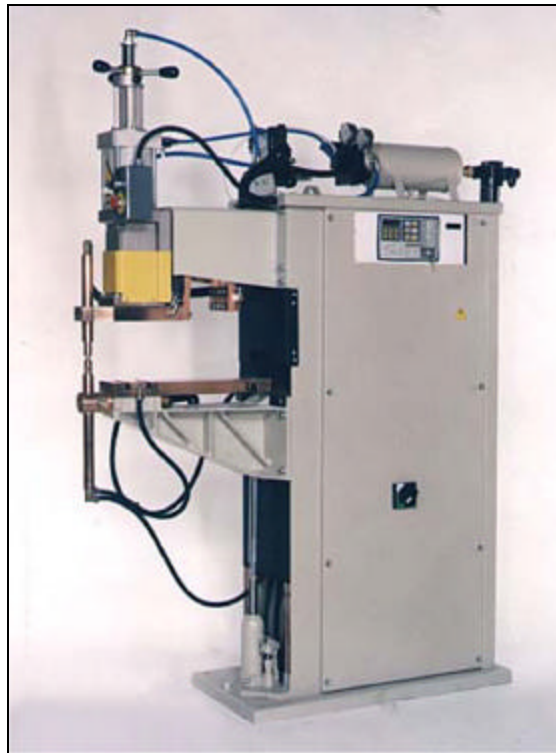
The TECNA resistance spot welding equipment
